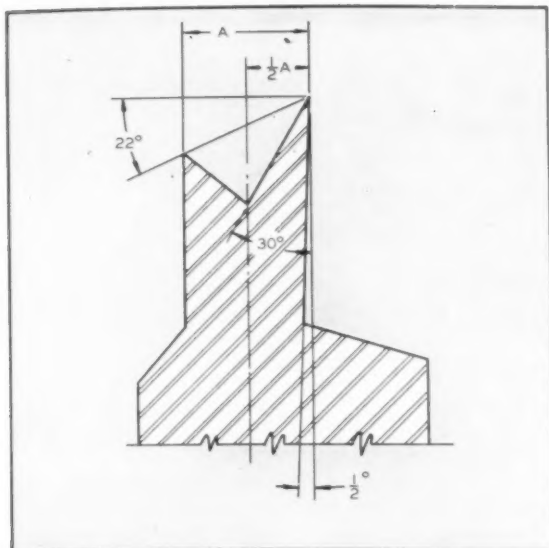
A cutoff tool with two points will prevent a burr being forced into the hole when cutting off sections of tubing.
